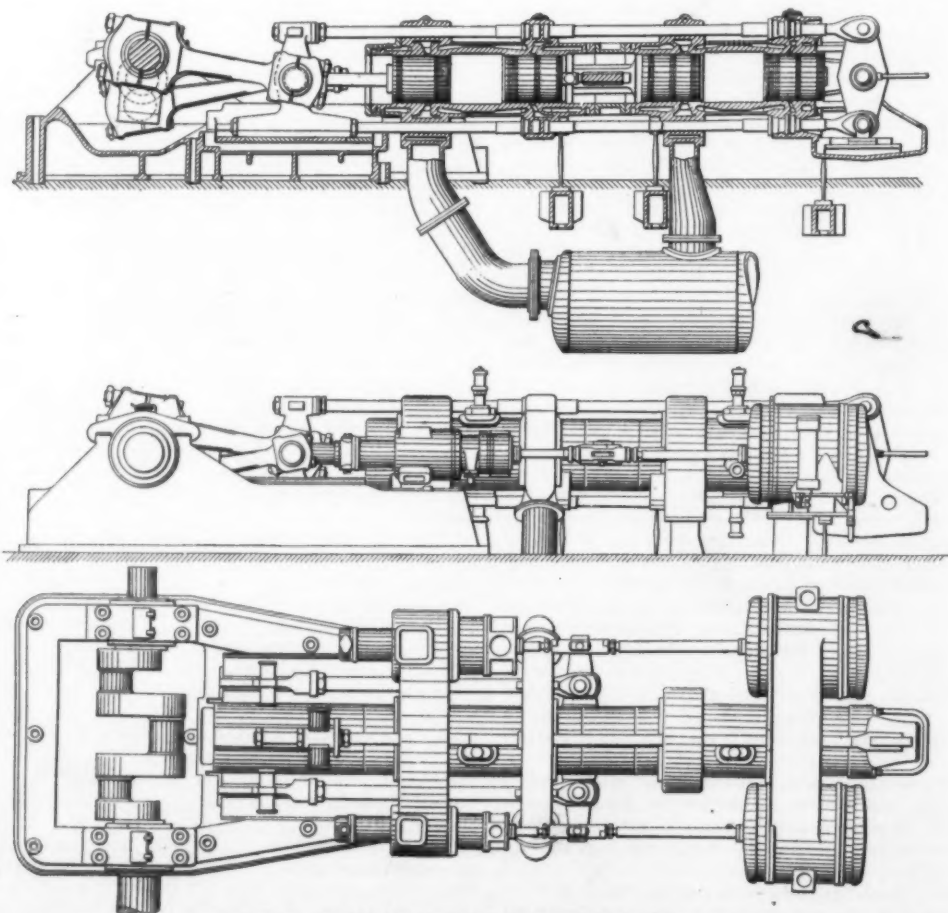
Sectional, Side and Plan Views of Junkers Engine.
